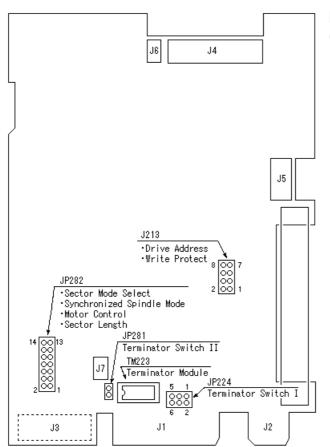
A SZ931 PCB Layout (PCB Rev. 1 or Later)
